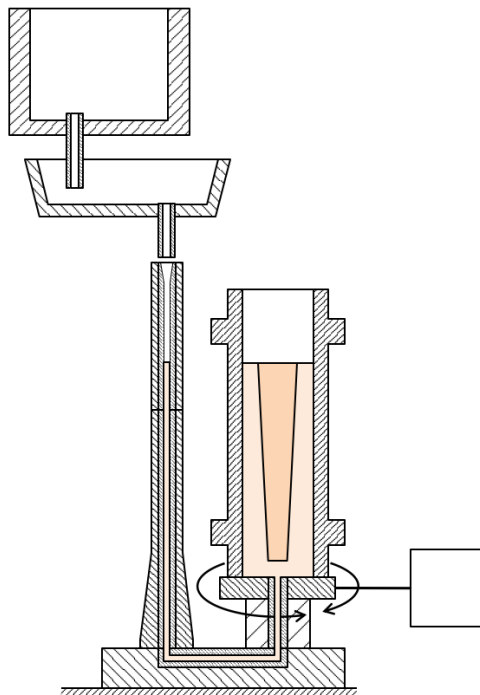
Schematic illustration of the Rotating Casting Mold (RCM) technology
